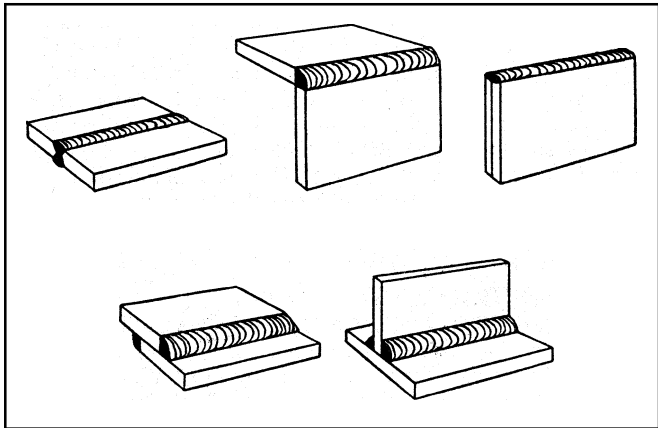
TYPES OF WELDED JOINTS
